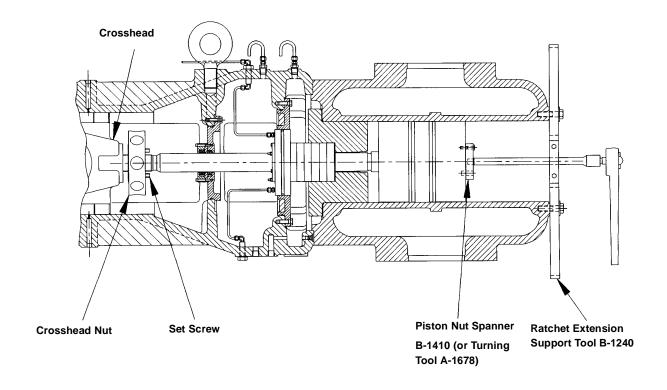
PISTON AND ROD INSTALLATION - TYPICAL
